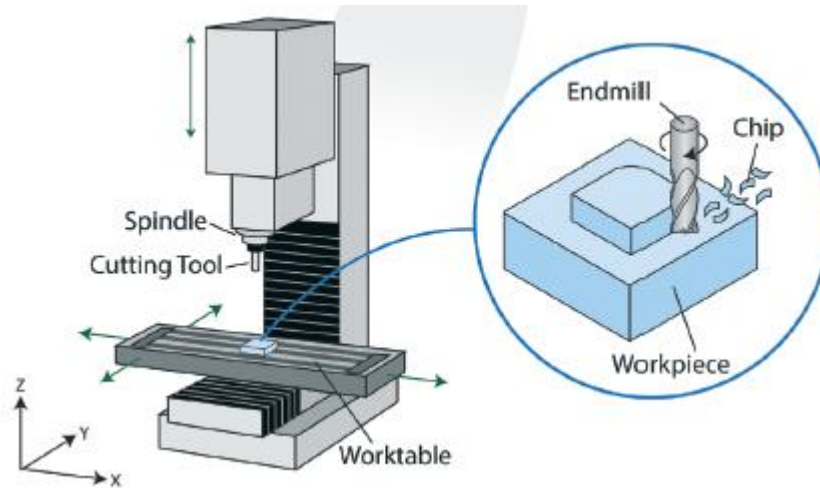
Schematic representation of a basic milling machine consisting of worktable, cutting tool and spindle. Insert represents the milling action on a work piece by an end mill tool apparently producing the chips.
